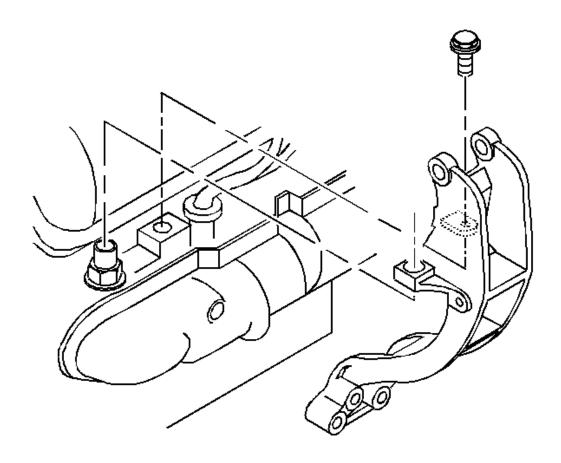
Right Engine Mount Strut Bracket Courtesy of GENERAL MOTORS CORP.
